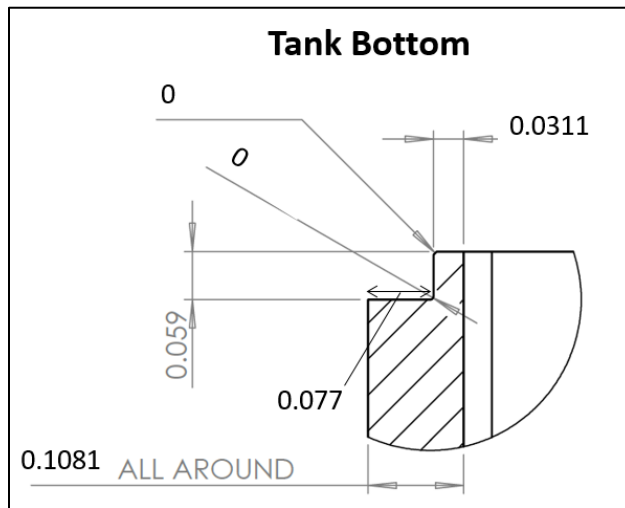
Worst Case Weld Geometry – Tank Bottom
